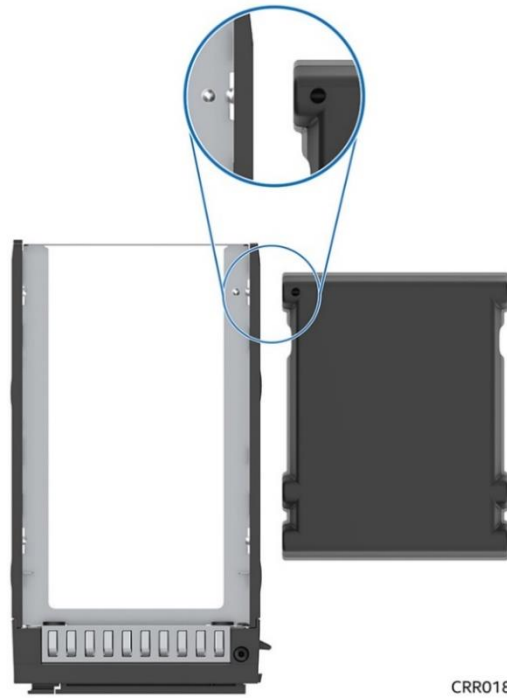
2.5" Drive Carrier Assembly – Alignment Features
